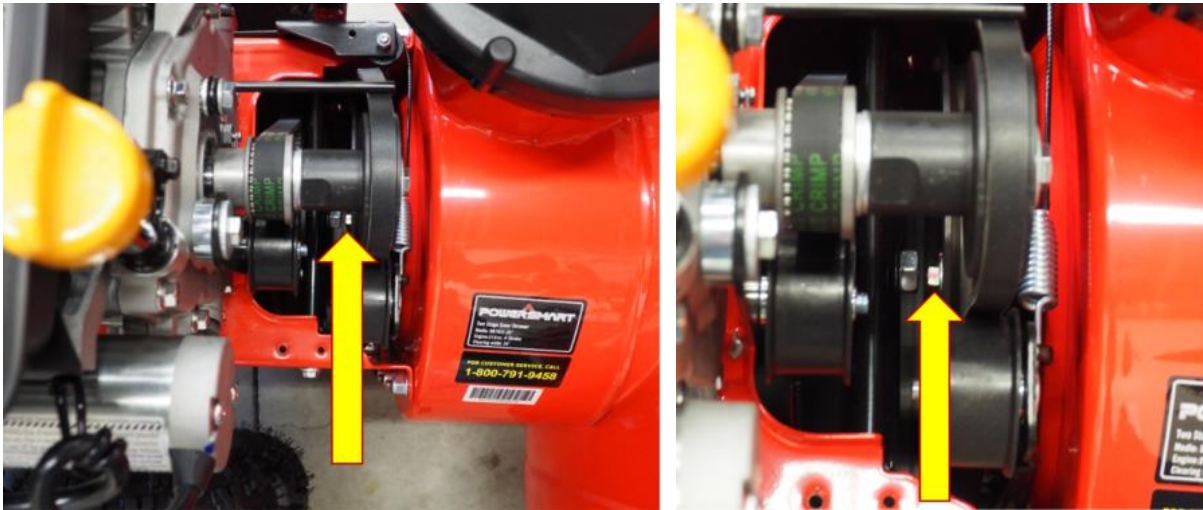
The auger pulley bolt is the bolt closest to the auger housing.
